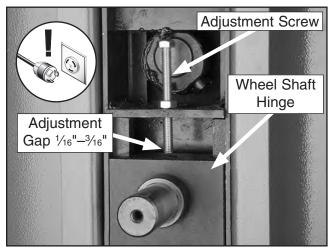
Tension lever adjustment components (top wheel removed for clarity).
